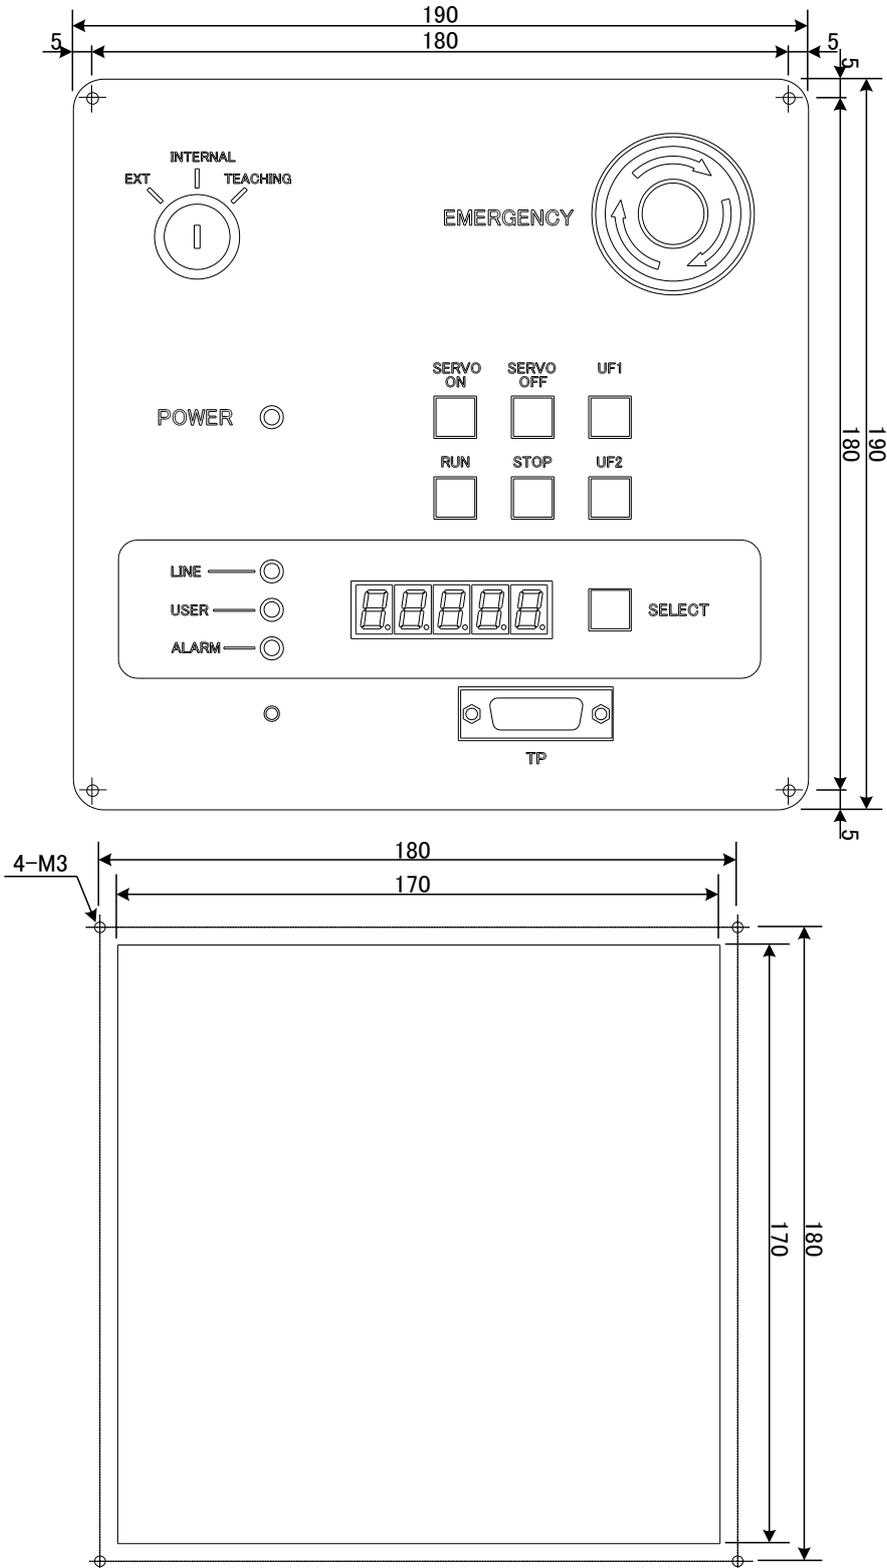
Installation dimensions of the control panel (TS3100)
